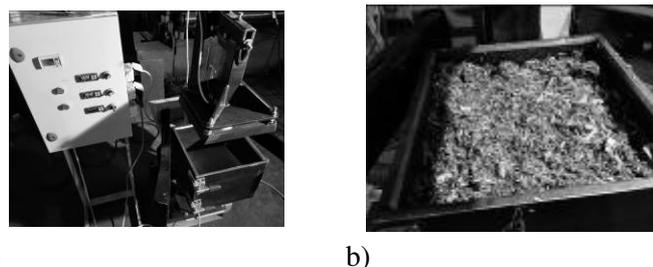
Press for pressing the fleece material: a – pressing equipment; b – pressing chamber
